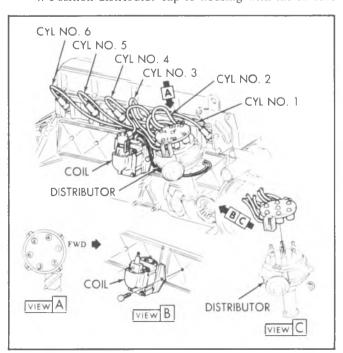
D-4i--8 Cylinder HEI Ignition Wiring
